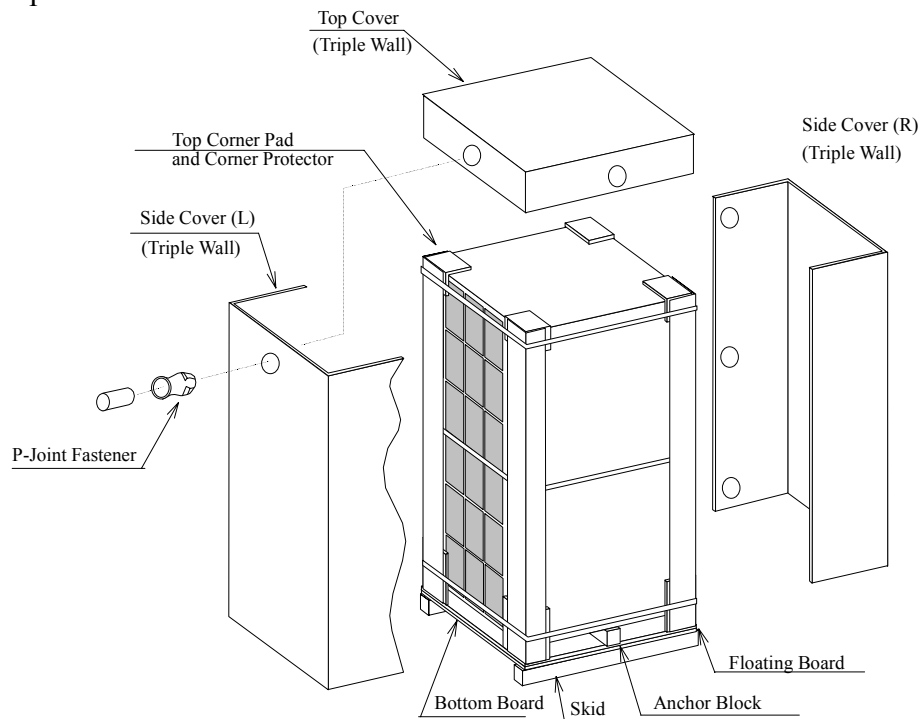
Breakdown of CARD BOARD Crate
